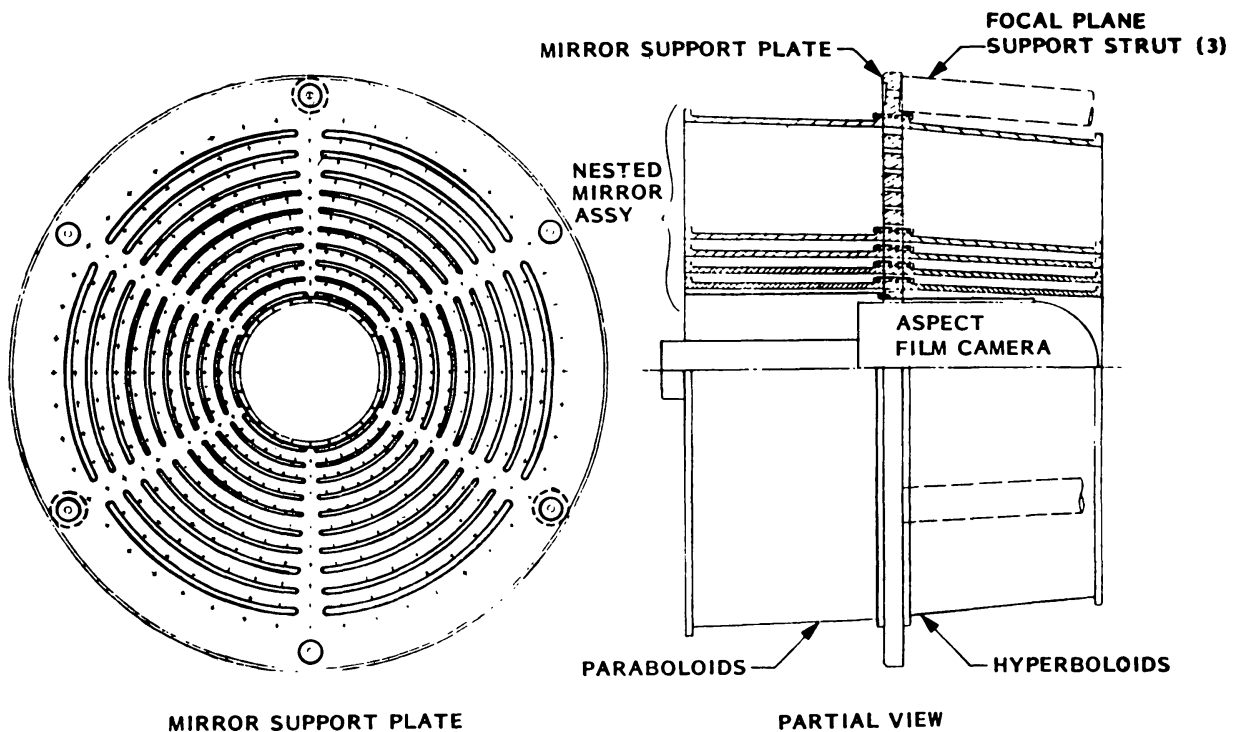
HRL Mirror Assembly. Views in the plane of the Mirror Support Plate and of a Partial Assembly cross section are shown.
